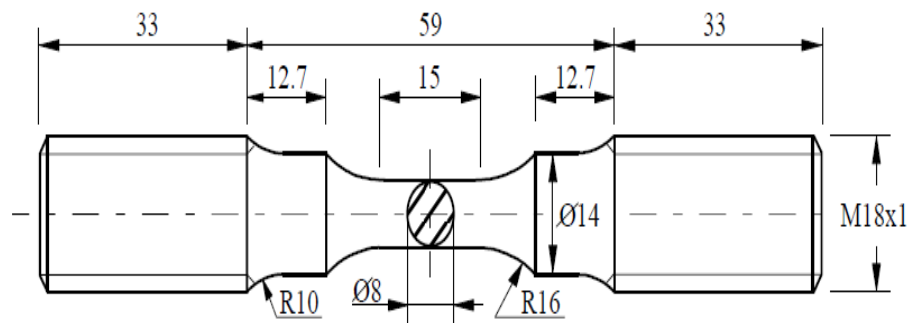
Geometry and dimensions of the specimen using ASTM E606 standards
